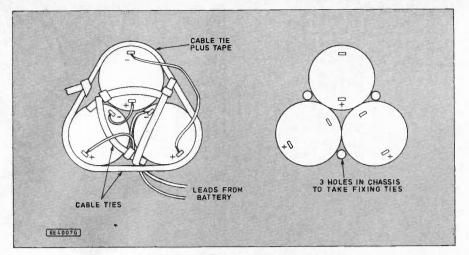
Method of fixing cells. A cable tie and tape are used to bind the cells together and three cable ties are used to hold the battery to the chassis. Solder the wires to the cells before attaching to chassis, finally cover terminals with insulating tape.
